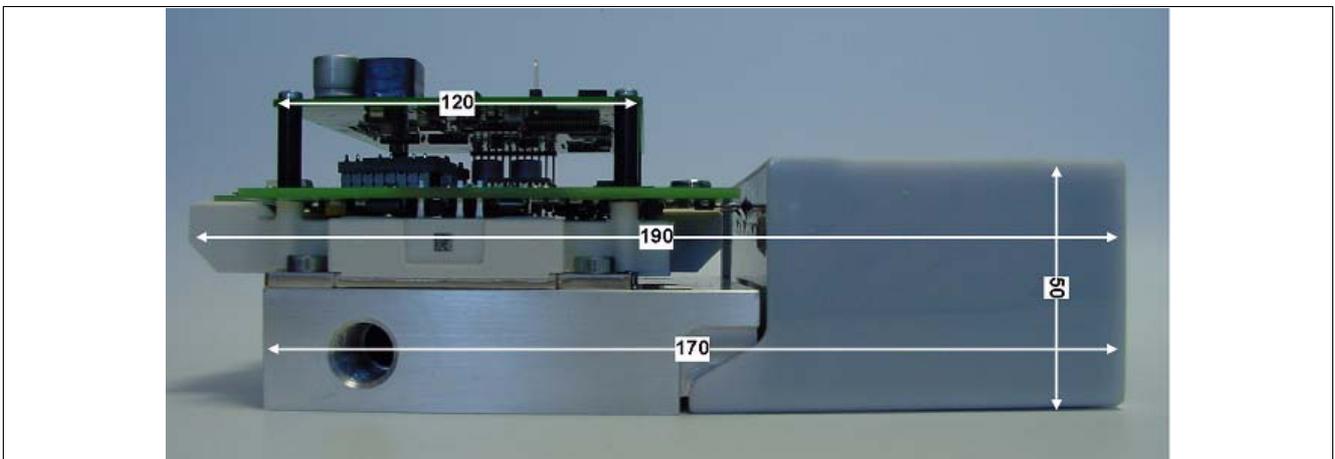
Dimensions of the Hybrid Kit for HybridPACK™1 - side view (all dimensions are in mm)
